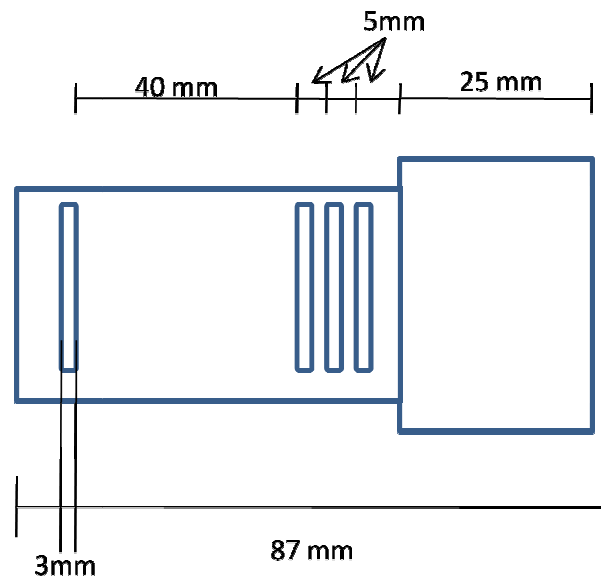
MOTOR MOUNT ENGINEERING DRAWING
